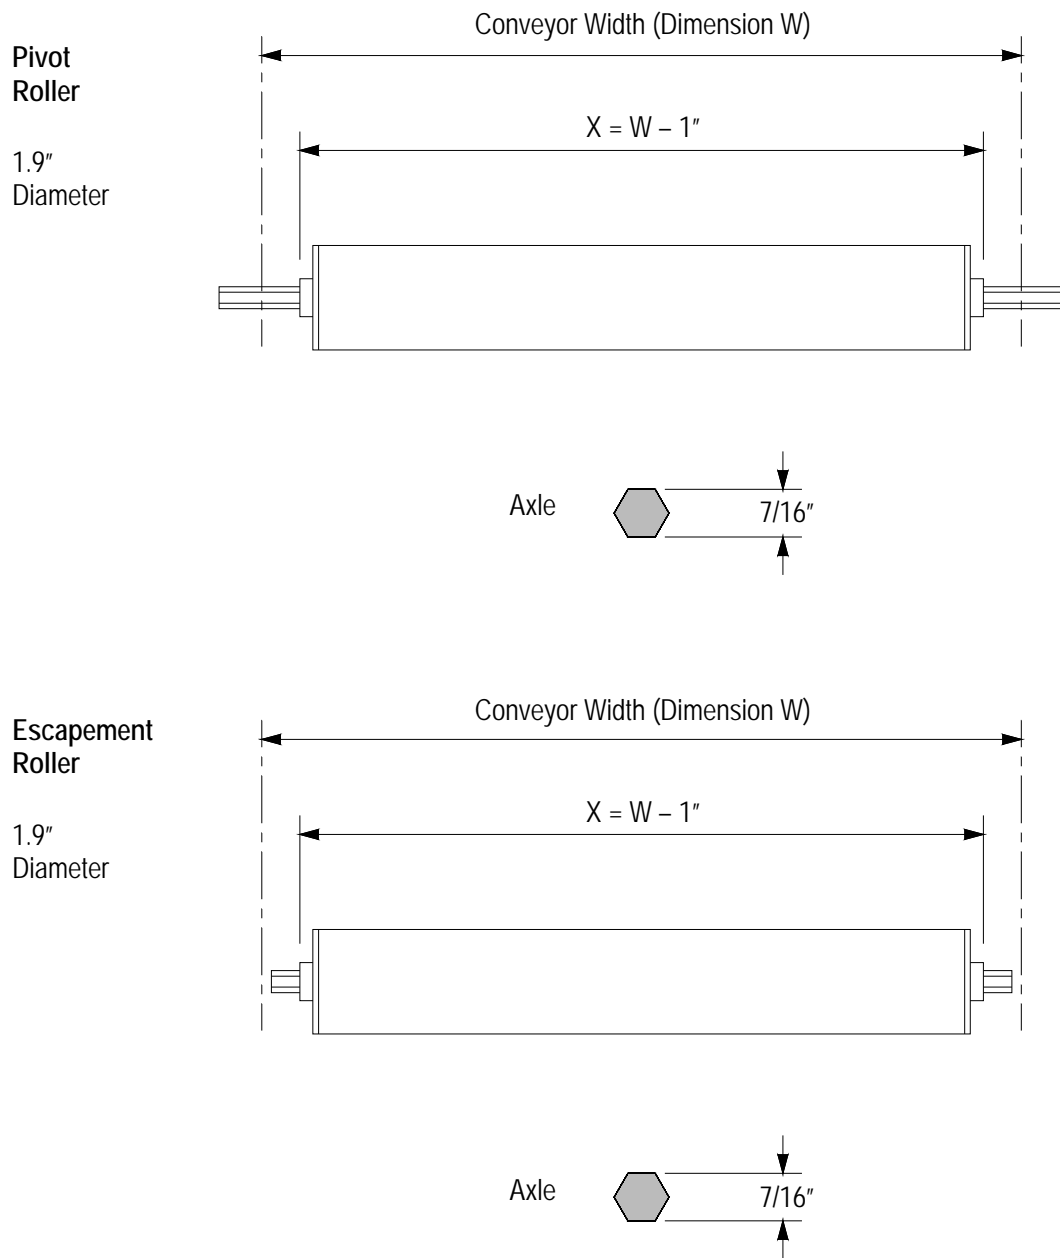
Roller & Axle Size – 3" & 6" Roller Centers
